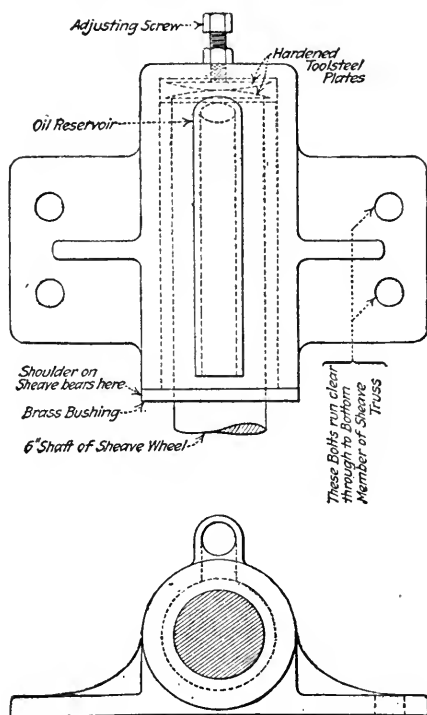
LOWER BEARING OF SHEAVE SHAFT.
